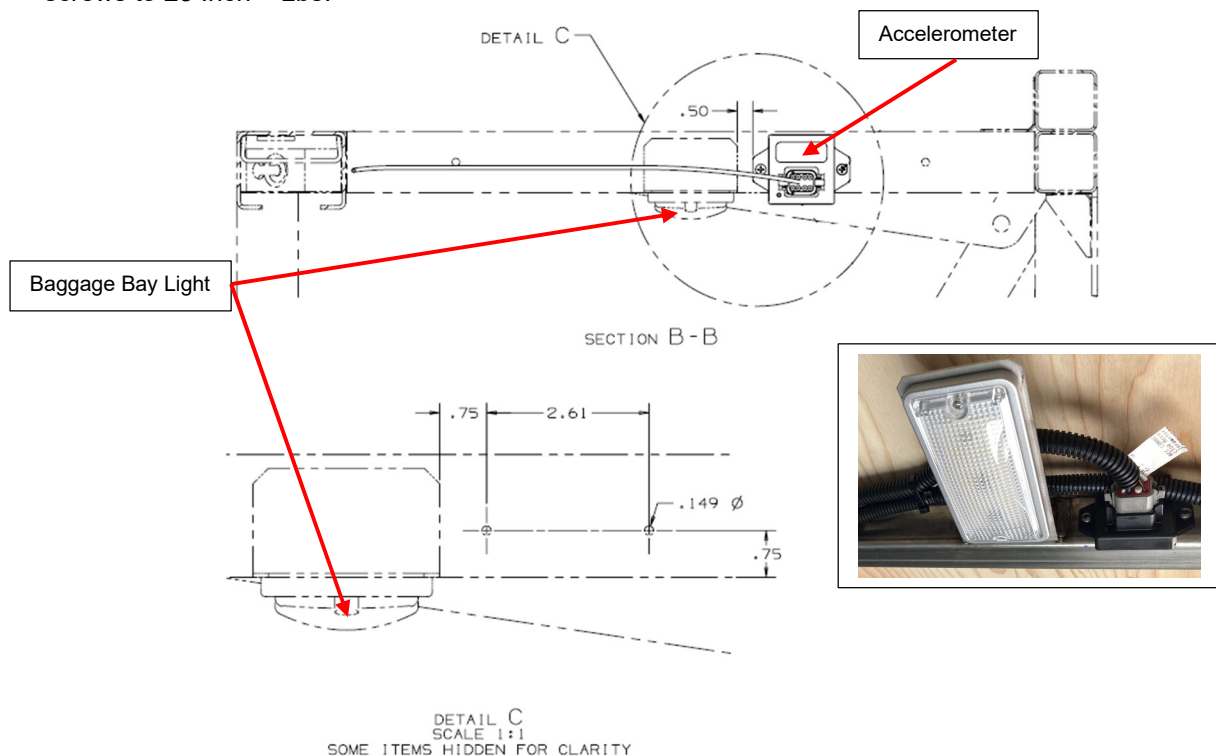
Drilling Locations for Accelerometer Mounting Screws.
